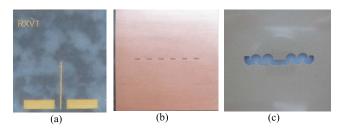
Manufacturing of serpentine slotted waveguide using a PCB etching process—chemical etching of the bottom layer (a), top layer (b), and silver layer film (c).
